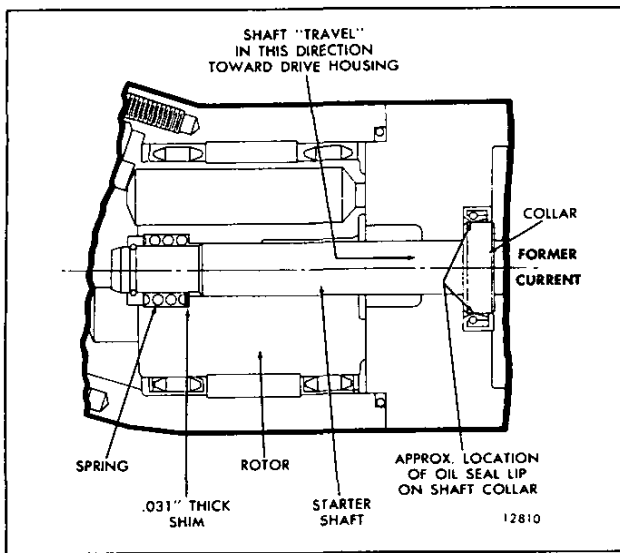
Location of Starter Shaft Compression Spring Shim (Series "20" Motor)
